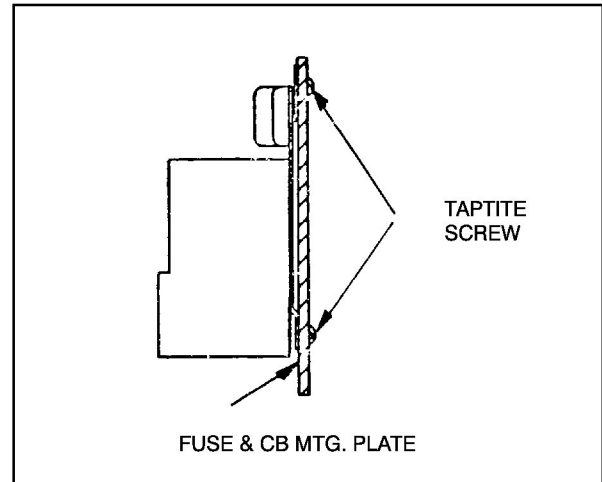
Side View Of Blower Motor Starter Mounted To Fuse/Circuit Breaker Panel
